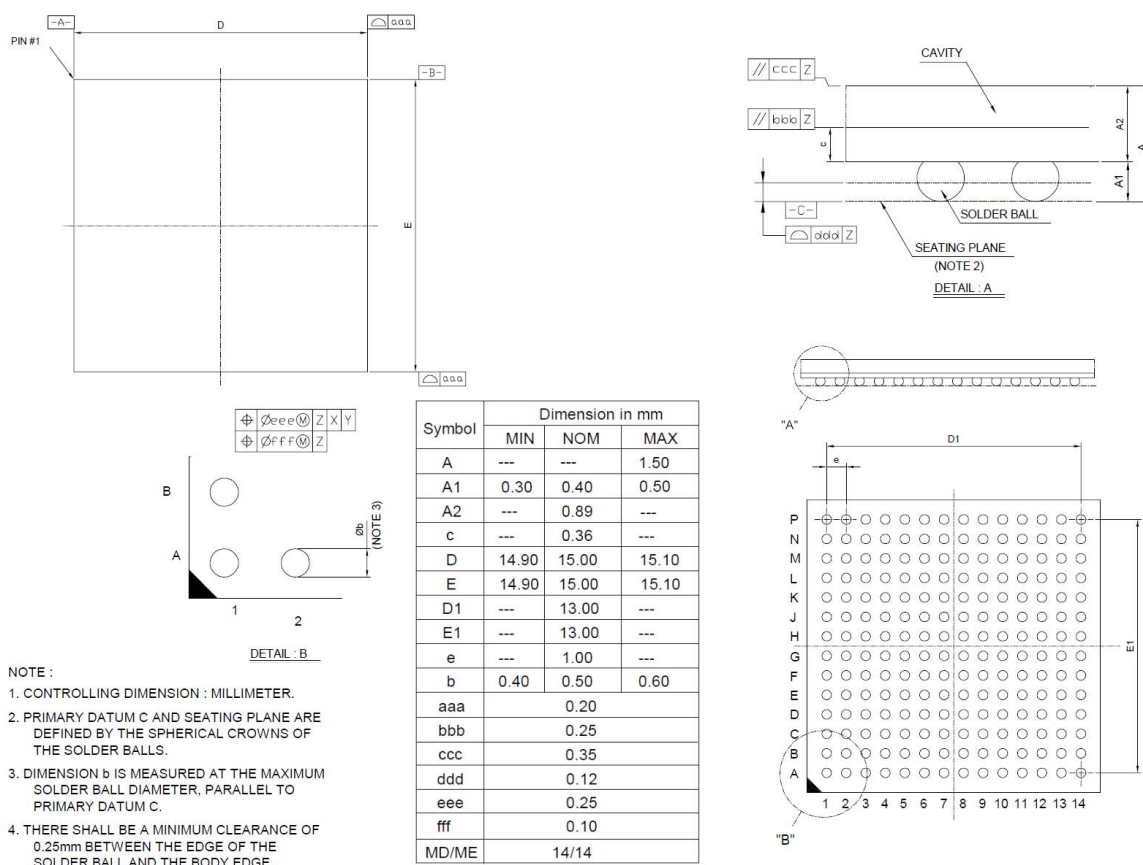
I347-AT4 TFBGA Mechanical Drawing
